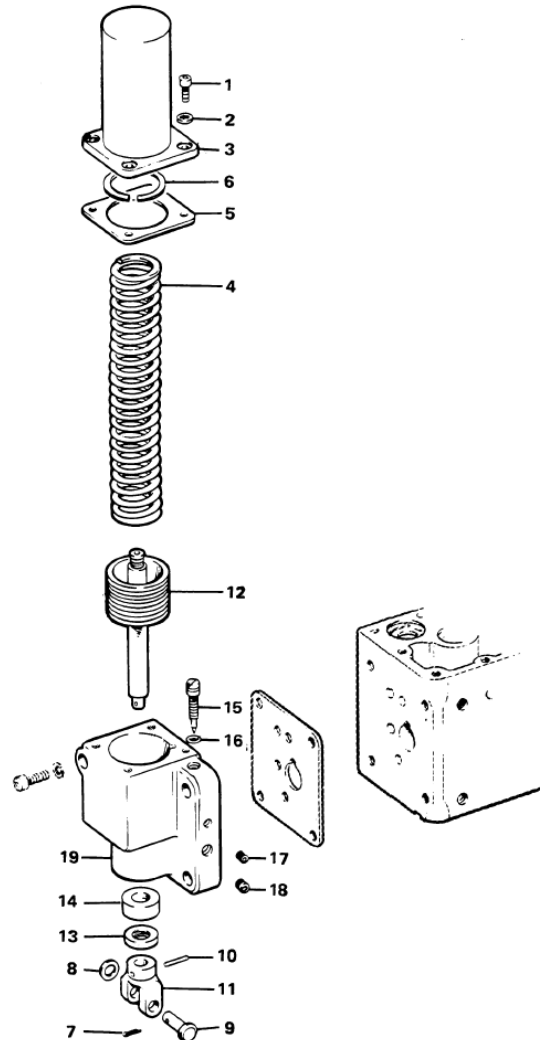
Exploded View of Spring-Loaded Power Cylinder
